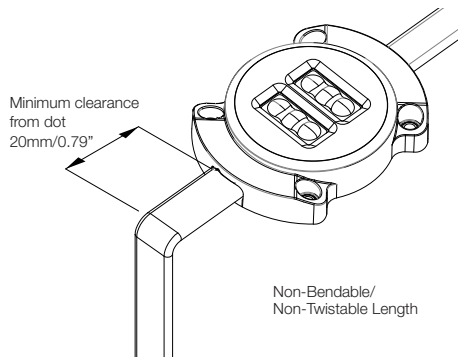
Minimum Cable Bending and Non-Bendable Length Requirement
